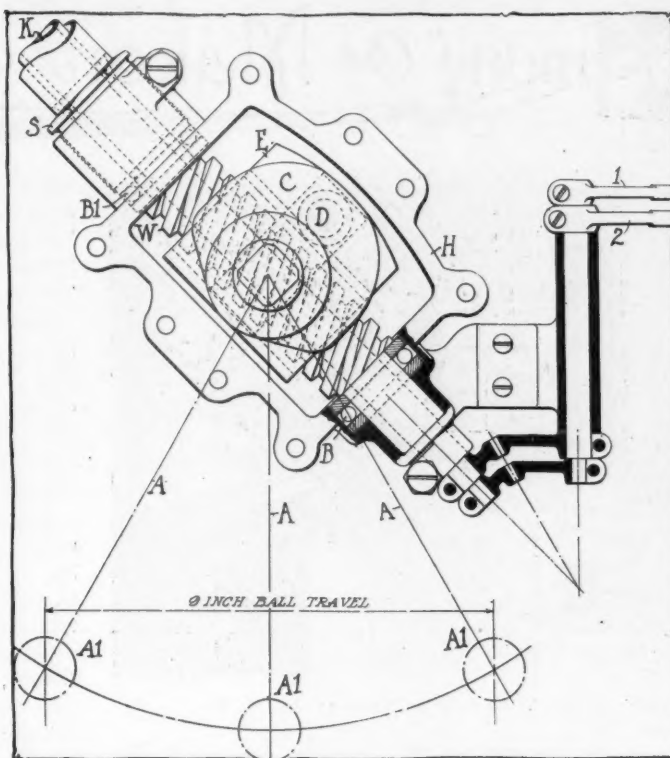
GRAEF-ARTHUR WORM-AND-NUT STEERING GEAR
